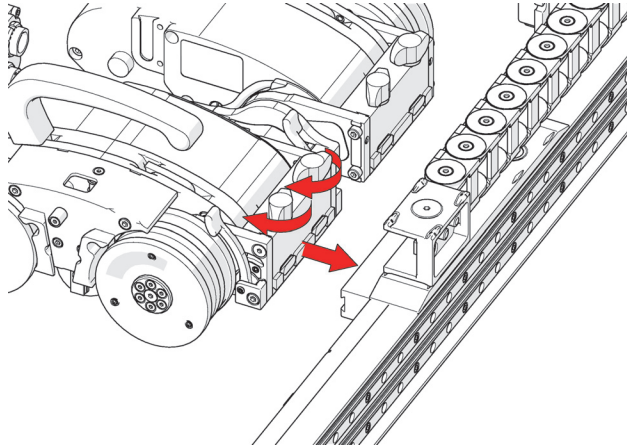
Mount raster arm to the right drive module's swivel mount
